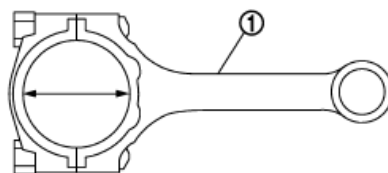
Measuring Inner Diameter Of Connecting Rod Big End
